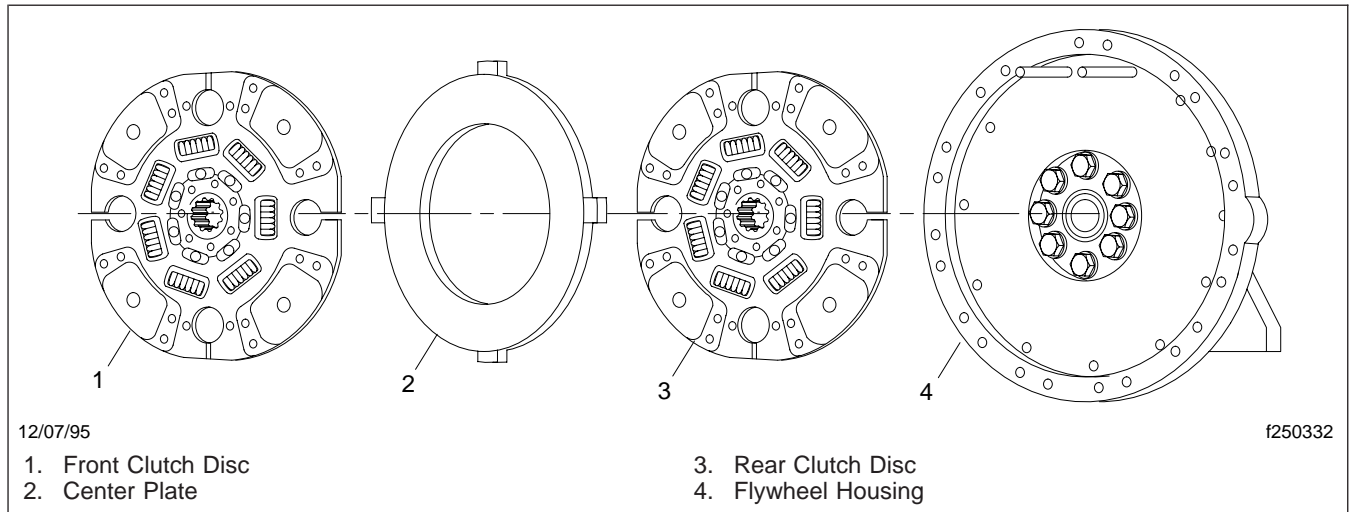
, Front Disc, Rear Disc, and Center Plate Removal
